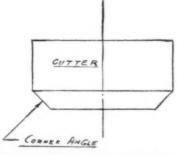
This 15° corner angle of cutter generally gives best cutter life.
